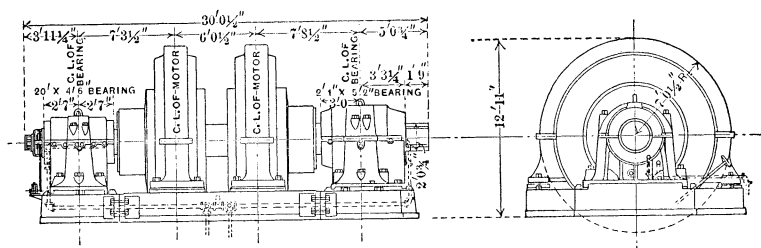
OUTLINE OF MOTORS FOR DRIVING MILL.
